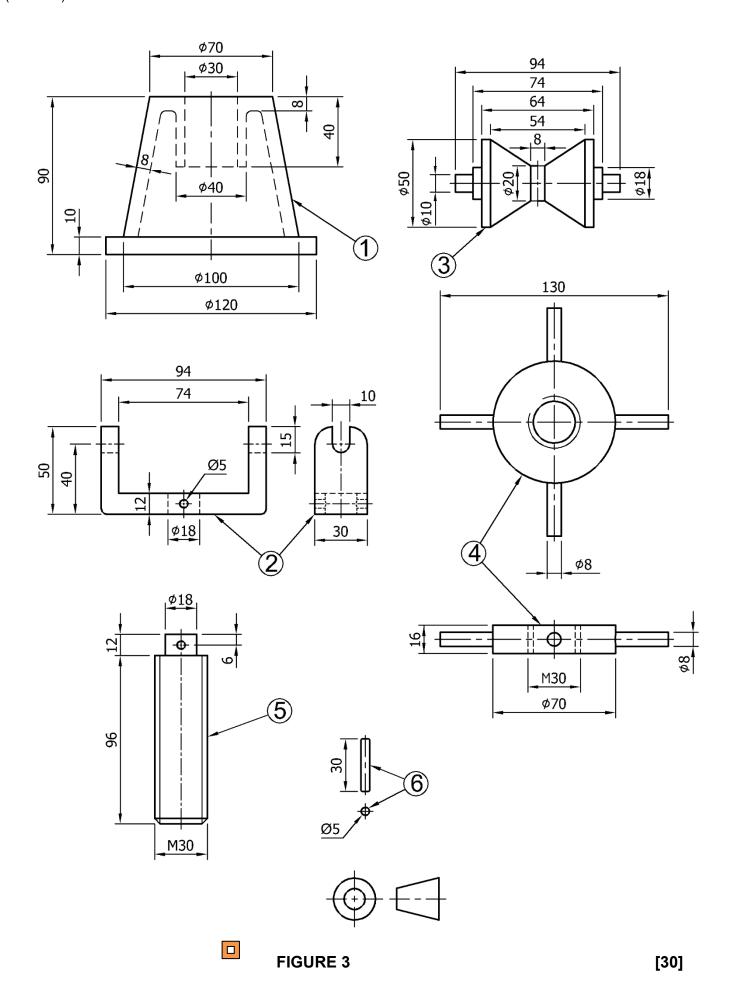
shows the primary views of the components of an adjustable roller-jack assembly.
